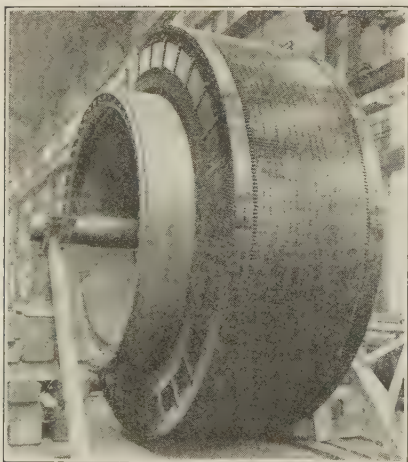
ARMATURE FOR 7000-Hp. REVERSING MOTOR SHOWING INVOLUTE EQUALIZER CONNECTIONS
